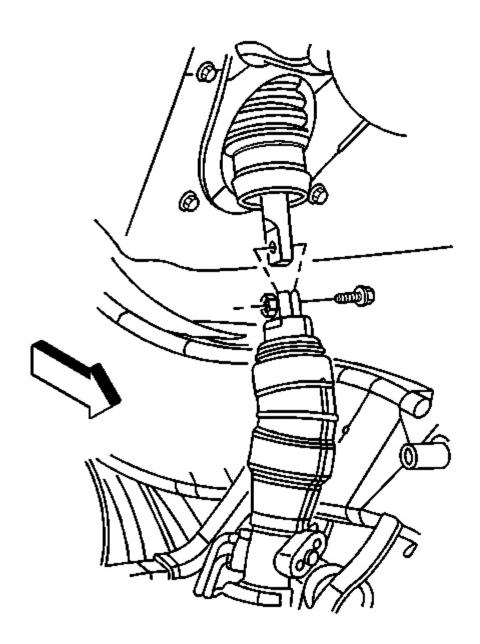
Steering Column To Steering Gear Connection Courtesy of GENERAL MOTORS CORP.
